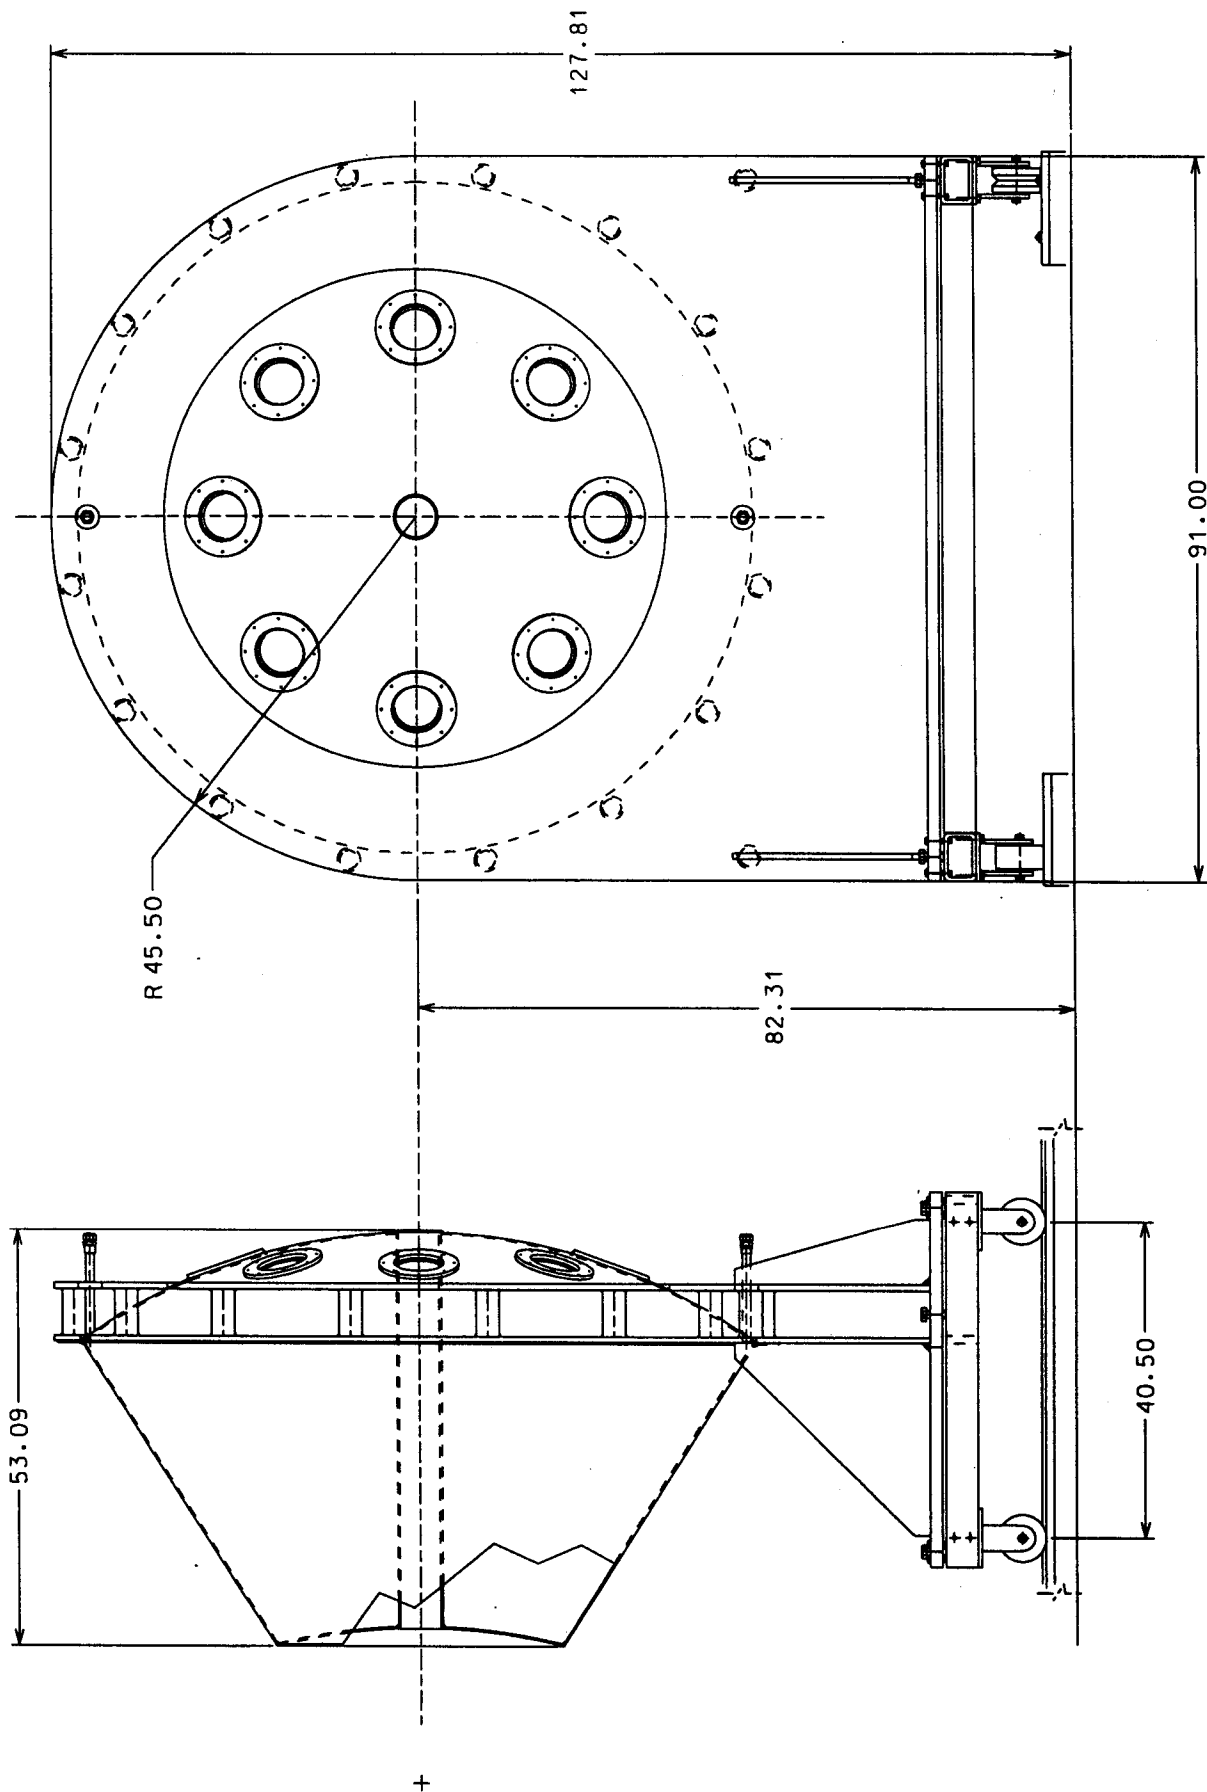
SuperBall engineering drawing of end and side view of tank segment 5.
